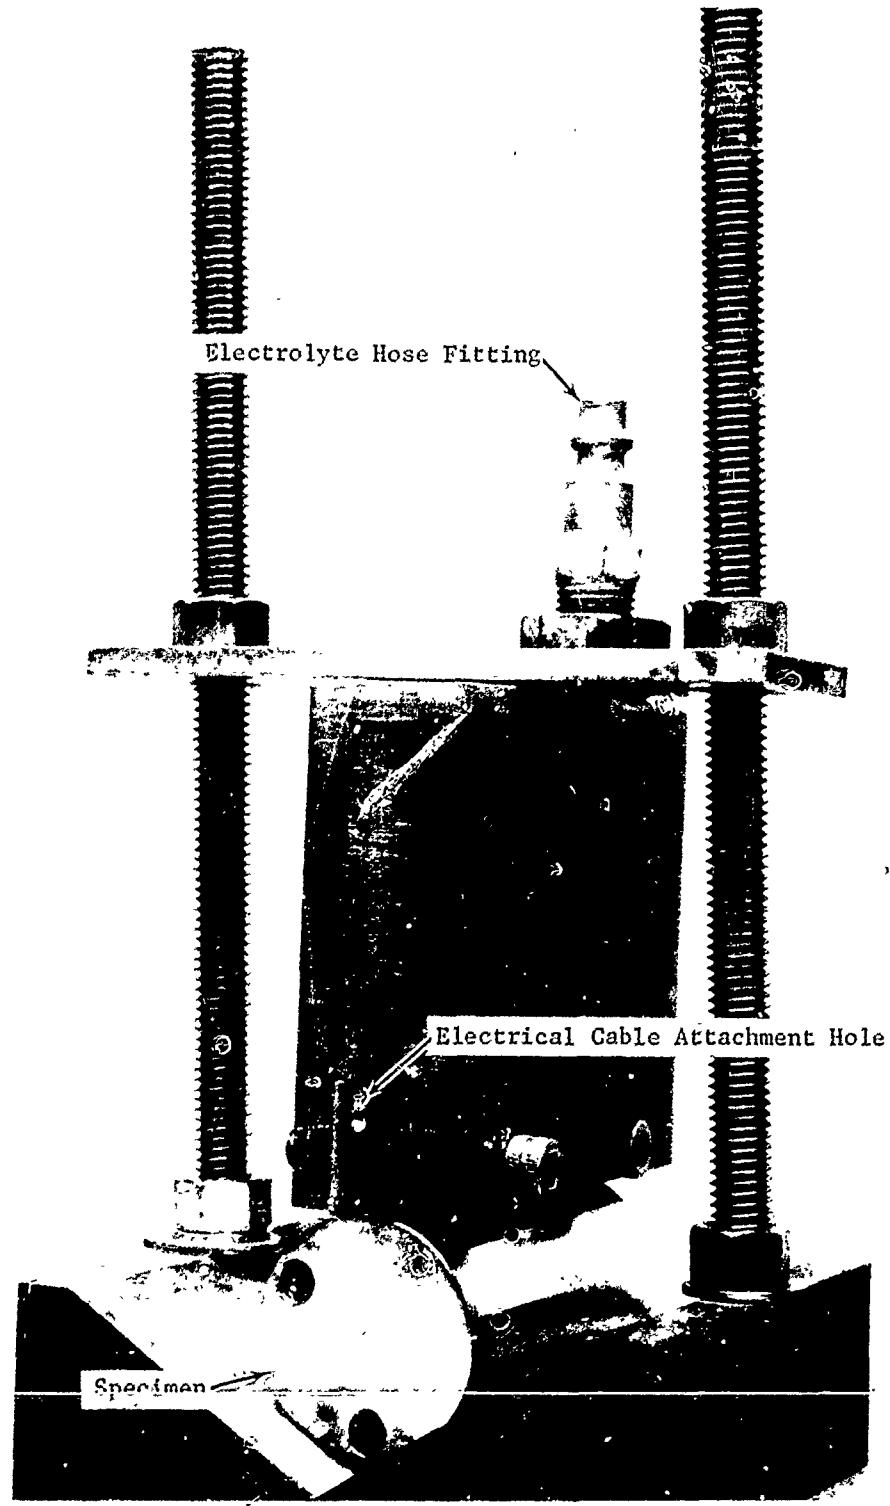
O.D. Rifling Test Fixture for Initial Electrochemical Machinability Studies (Assembled)
